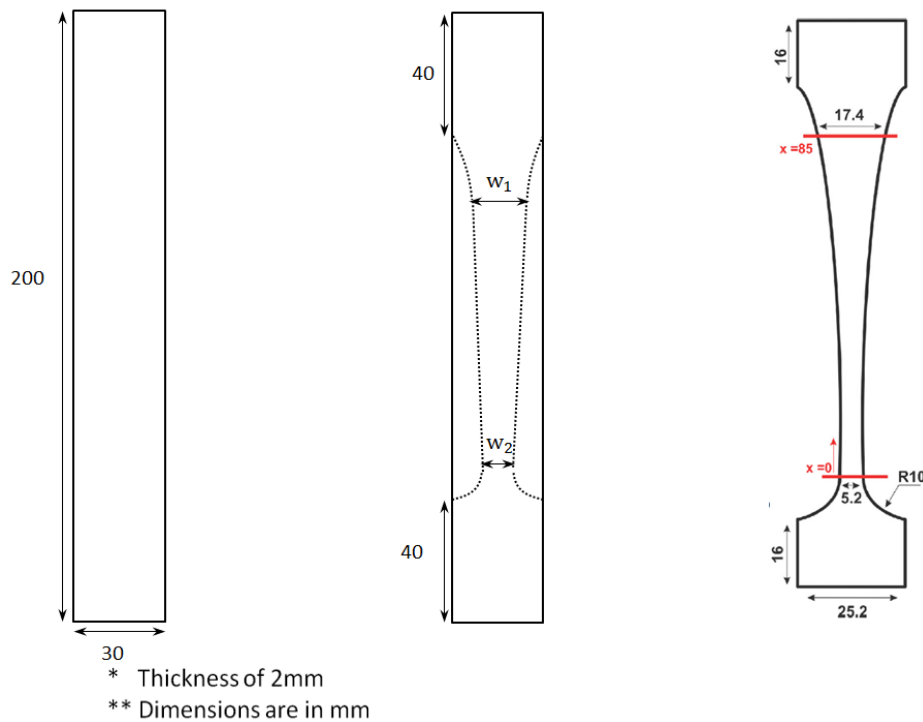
Initial shape and dimensions of the strip specimens (left), tapered shape with dimensions to be defined (middle) and tapered shape and dimensions from [7]. Dimensions are in mm. Drawing is not to scale.
